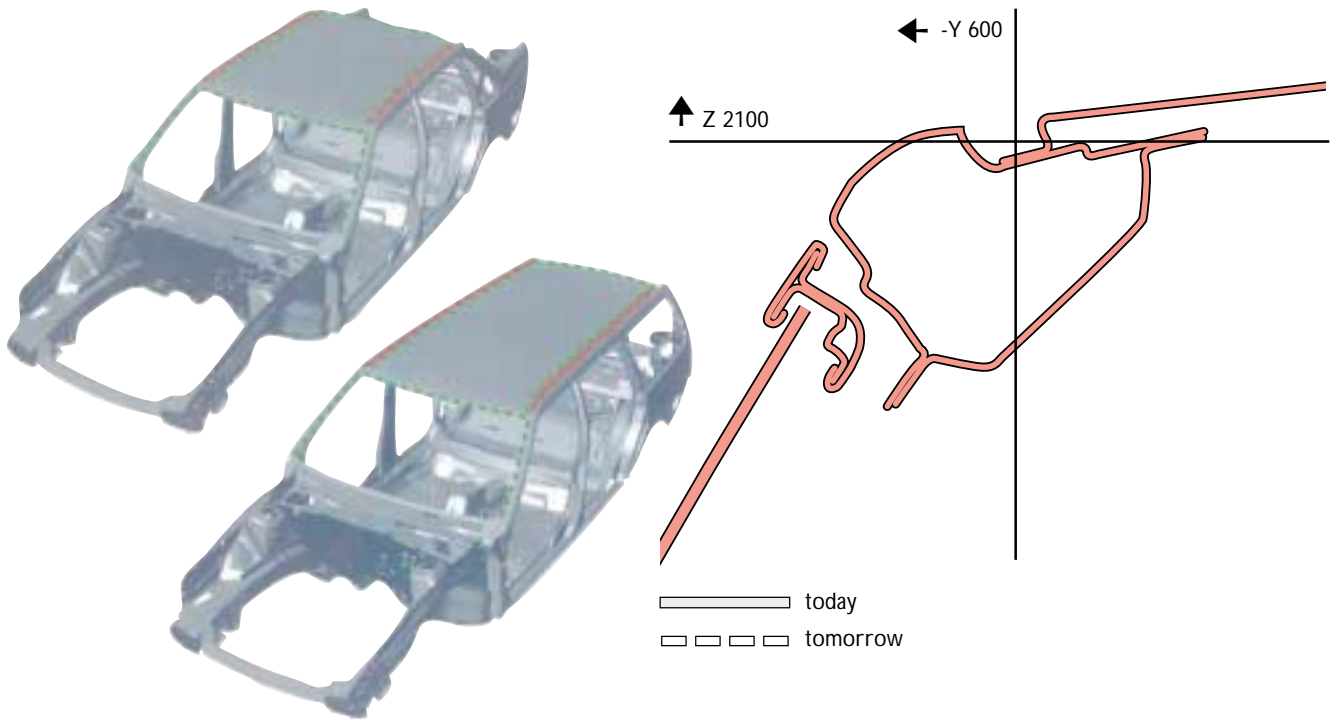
Volvo S80/V70, S70 and 850 roof/body side welding application.
